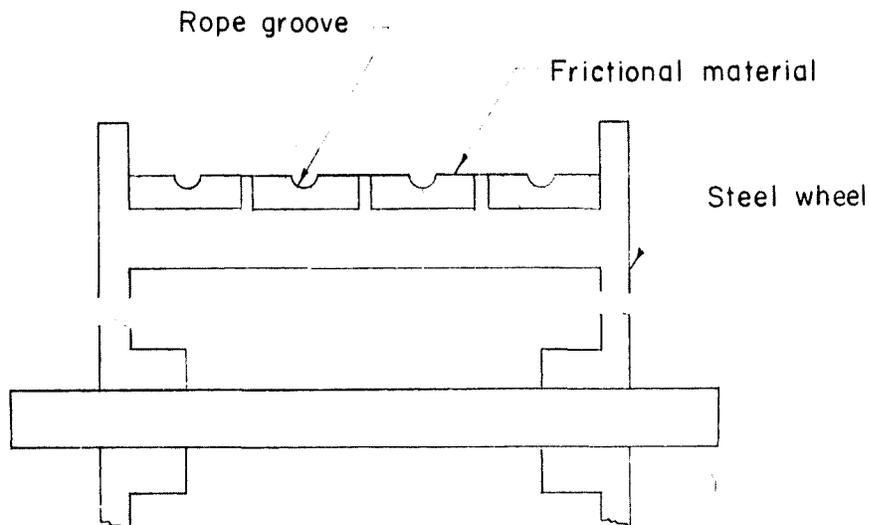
CROSS SECTION OF A KOEPE WHEEL
